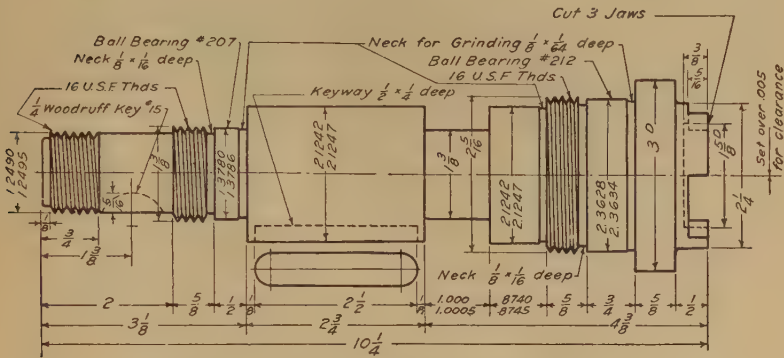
Tolerance dimensions (clutch shaft).
